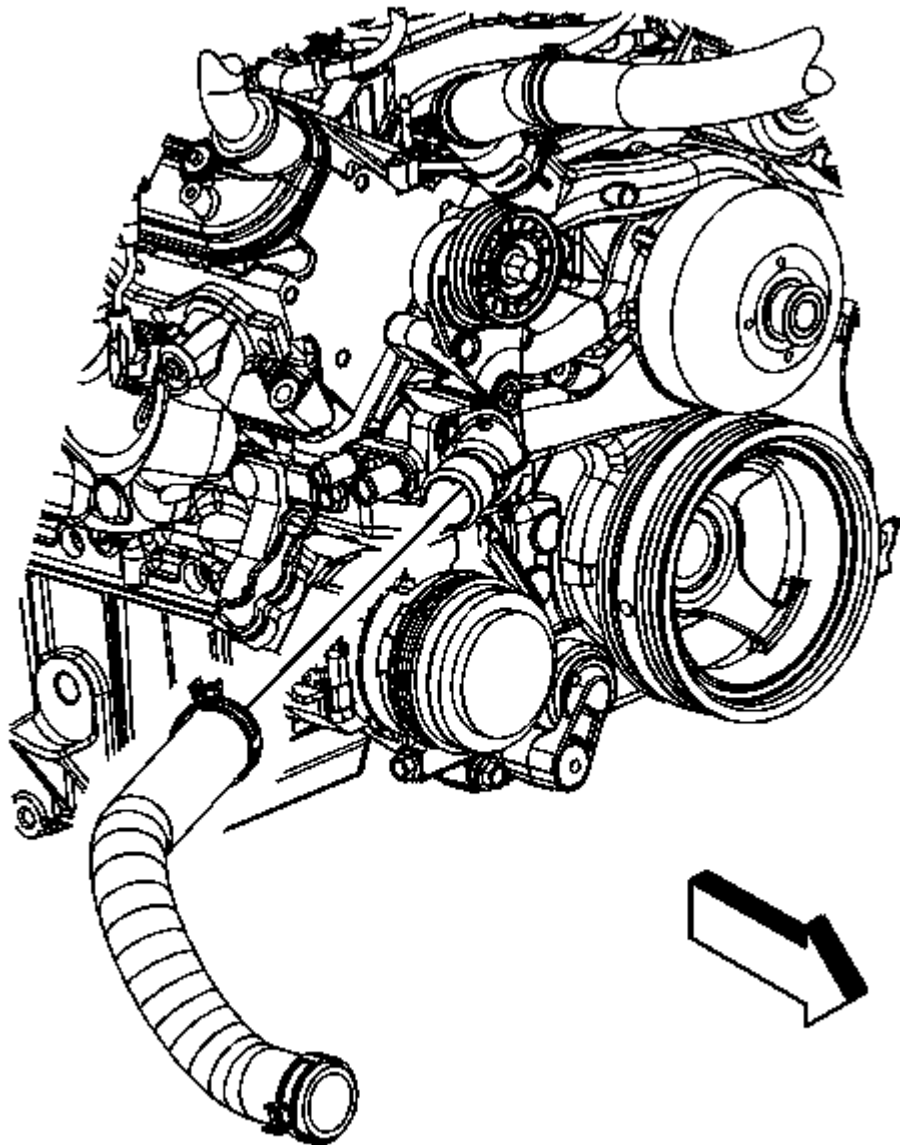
View Of Radiator Vent Inlet Hose Clamp At Water Pump
